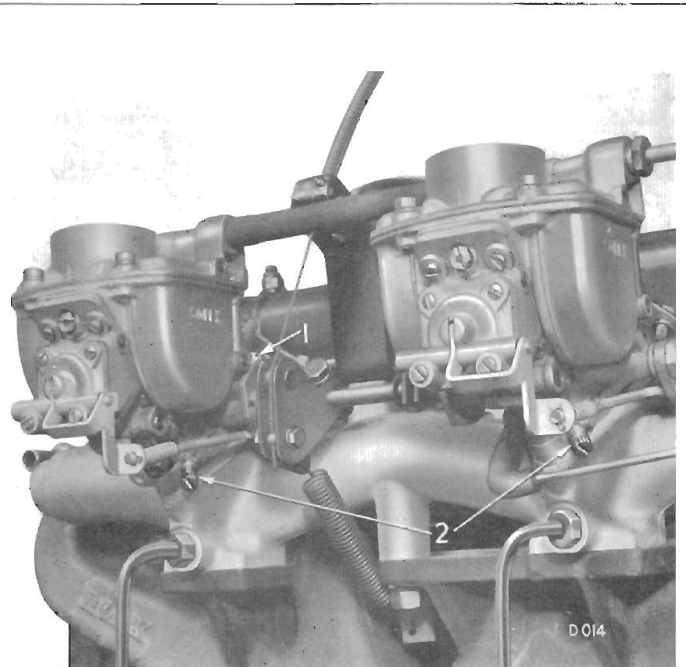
R.H. view of carburettors, showing mixture control screws (2) and throttle stop screws (1)
